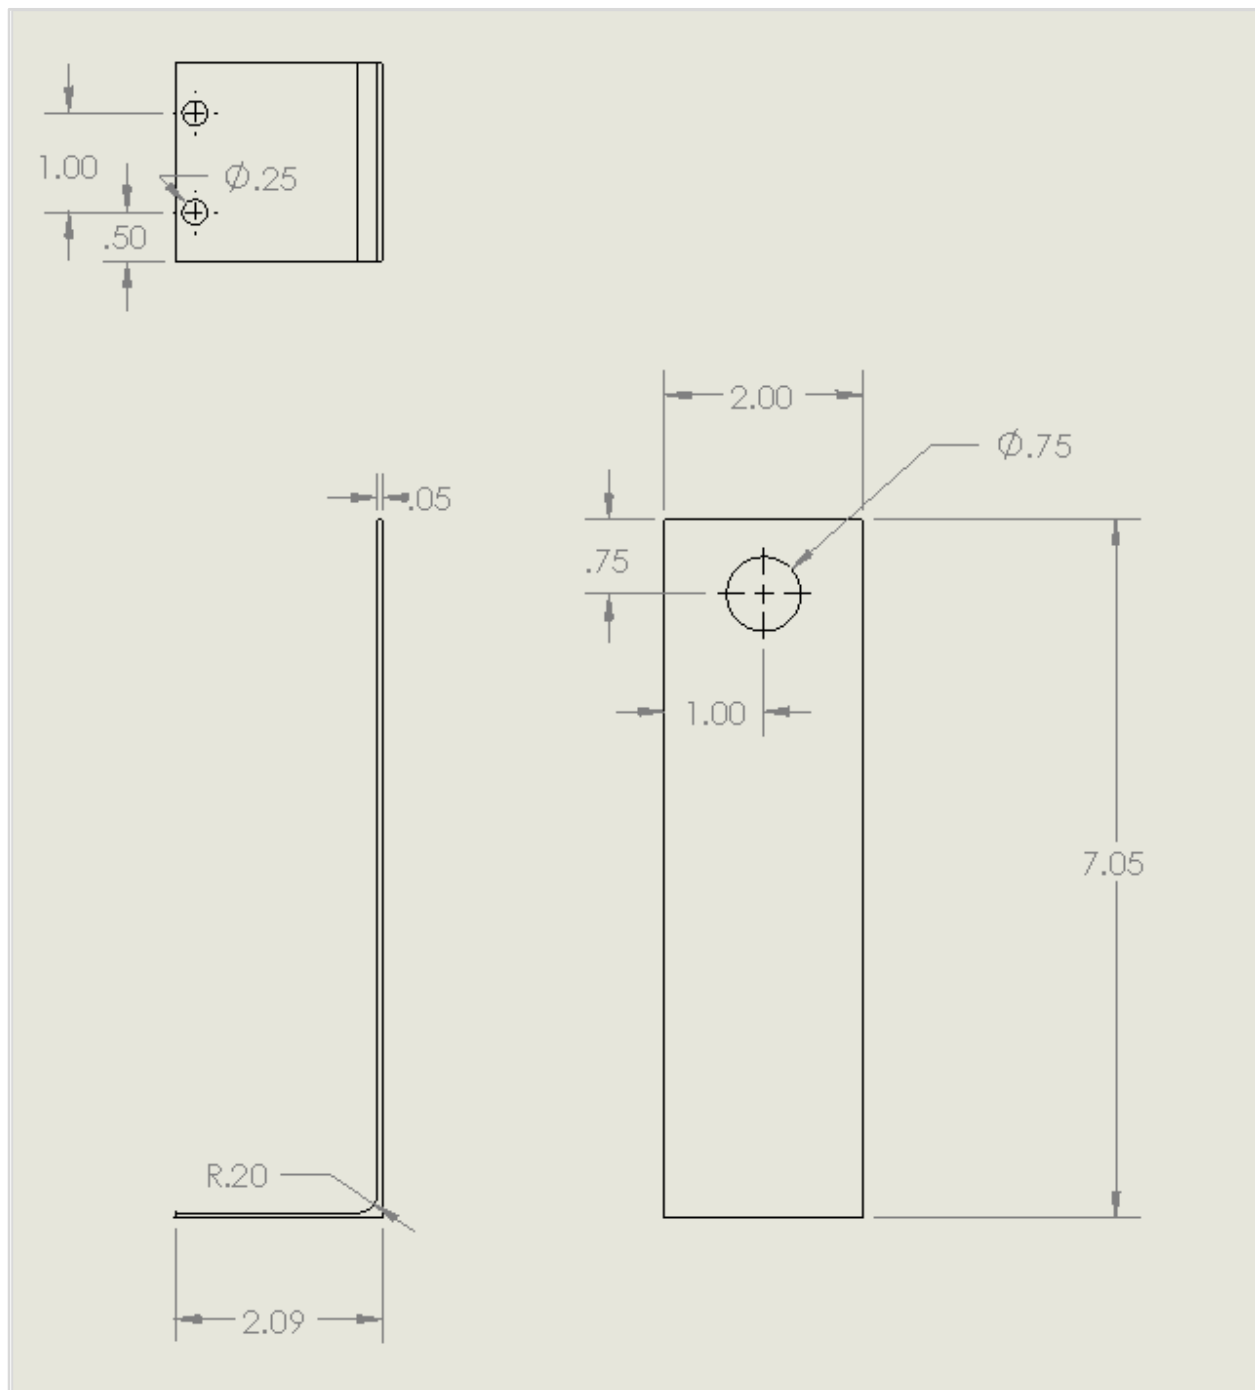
Electronics Bay Mounting Brace detail with dimensions.
